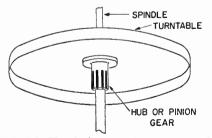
The hub or pinion gear on the turntable drives the other gears.
